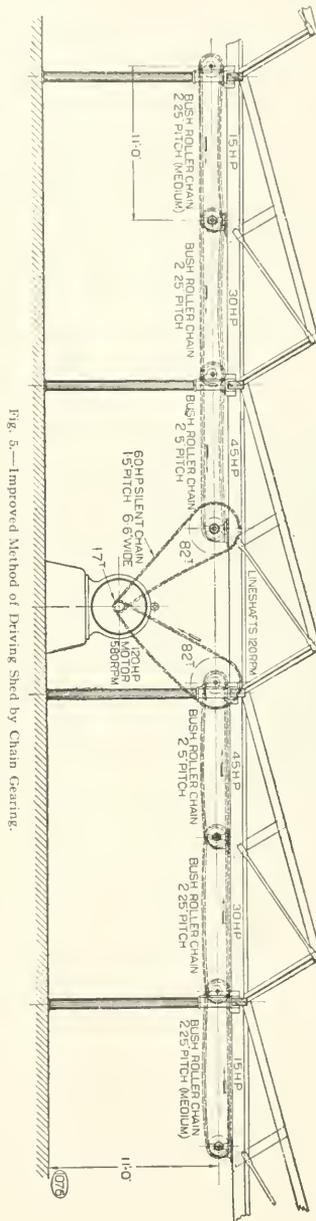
Improved Method of Driving Shed by Chain Gearing.
